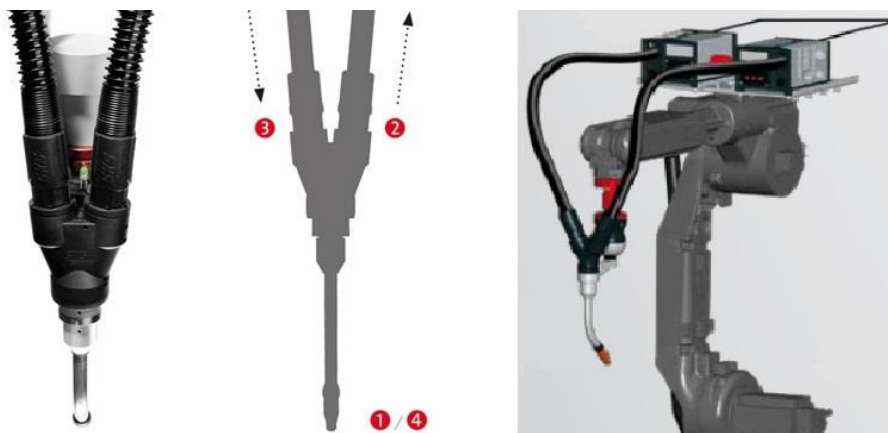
Wire changing system of the company SKS Welding Systems GmbH [15].
